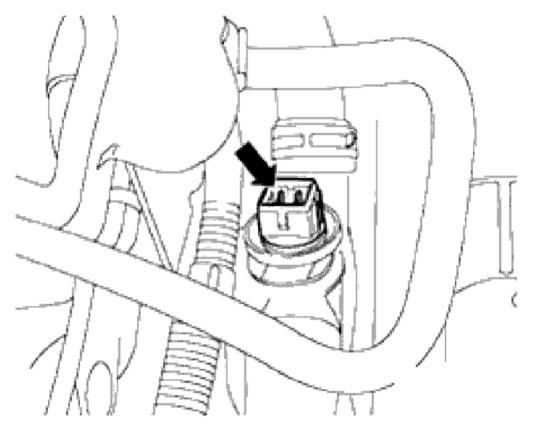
Identifying Engine Coolant Temperature (ECT) Sensor Courtesy of VOLKSWAGEN OF AMERICA, INC.
